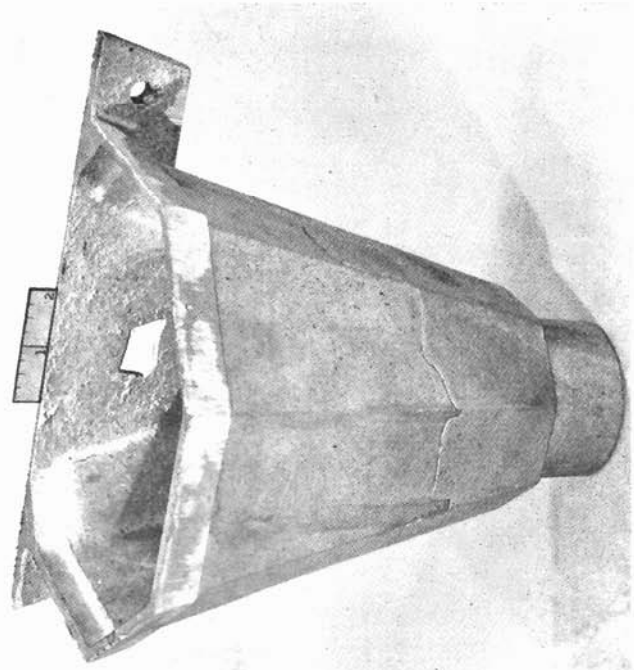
A cold shut or cold trap on the surface of an aluminium alloy sand casting.
